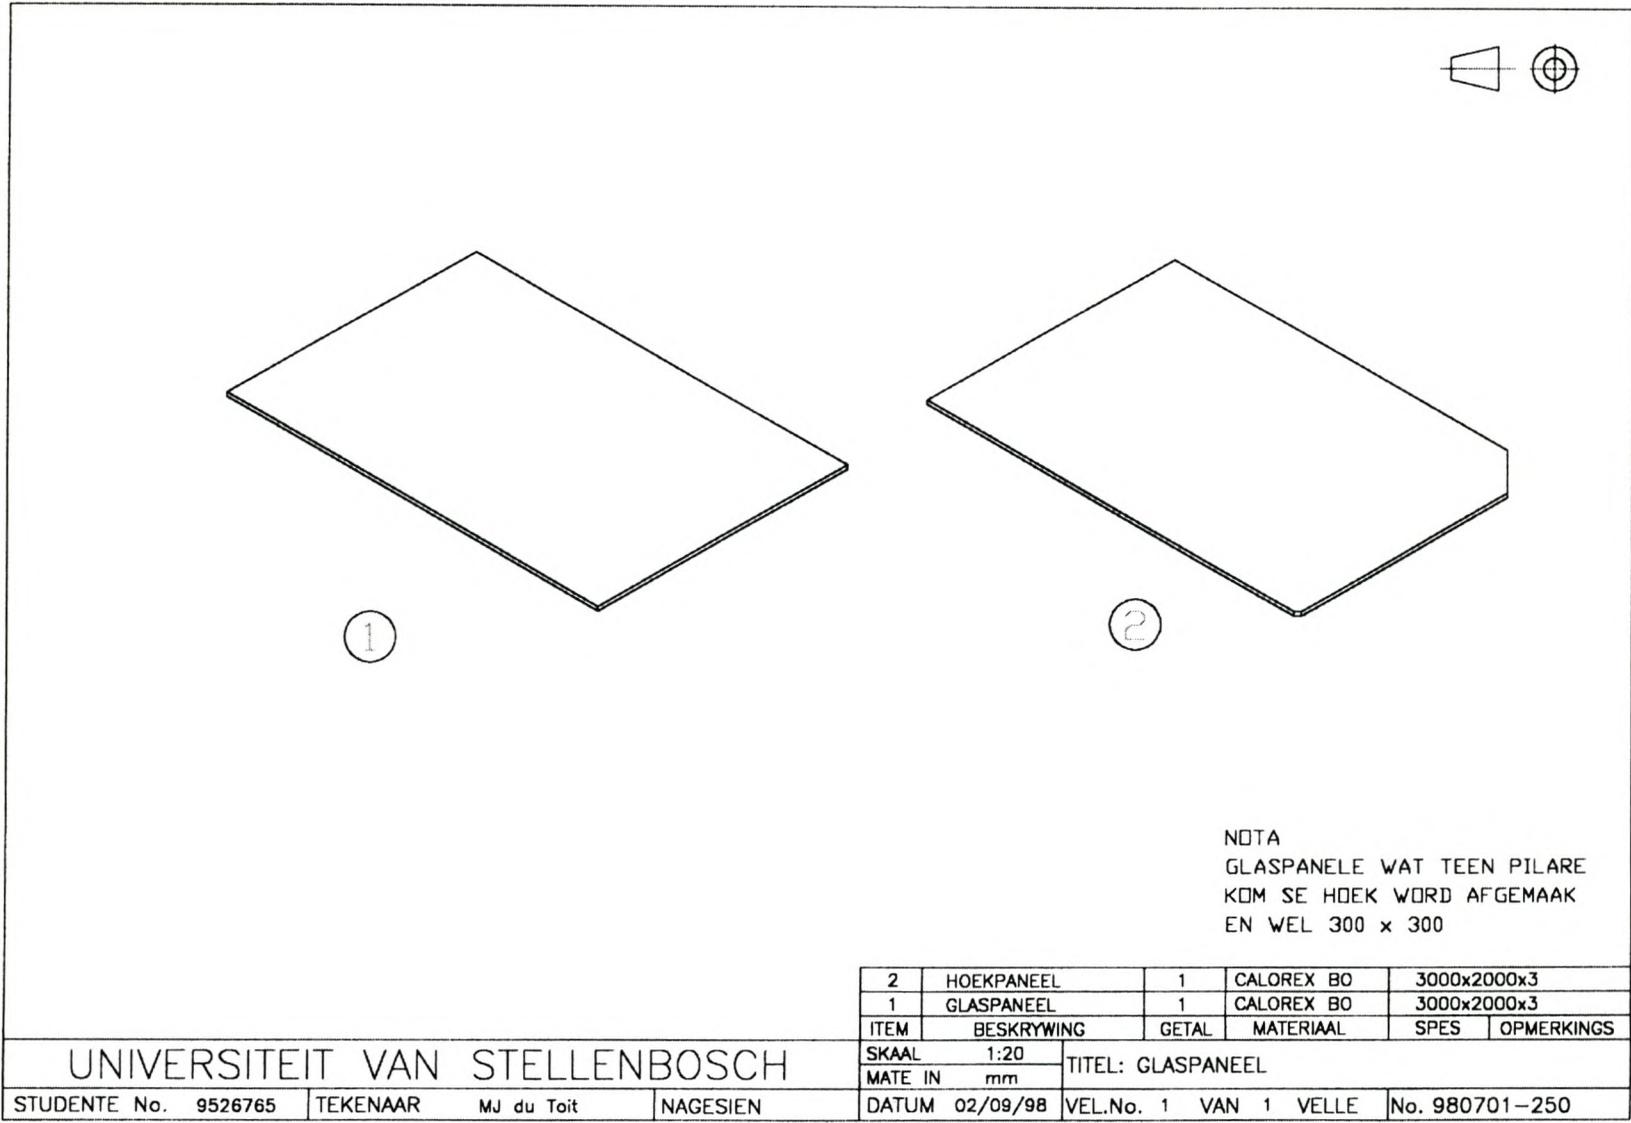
Solar Chimney Collector, Technical Drawing #5 [Roux et al., 1998]
